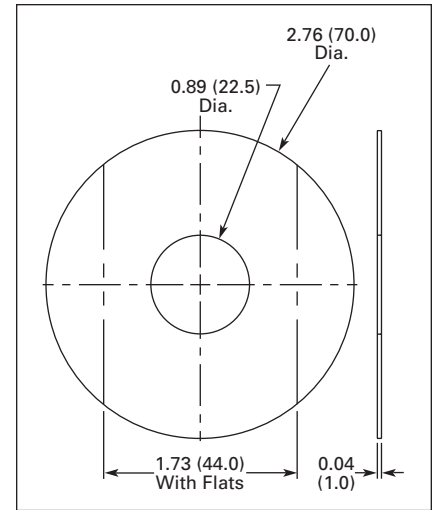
Joystick Nameplate Dimensions — Approximate Dimensions in Inches (mm)
